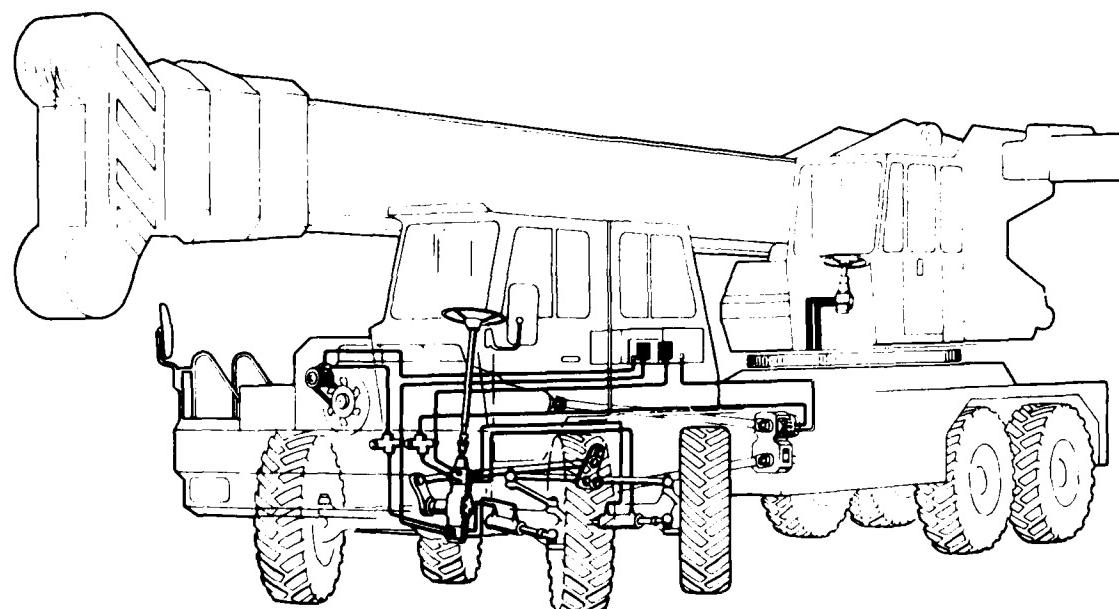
Specimen installation for Type 7421 dual circuit hydraulic power steering on a truck crane, with Type 7677 engine-driven vane type pump, Type 8607 vehicle-driven radial piston pump and one Type 8465 actuating ram at each steered axle
